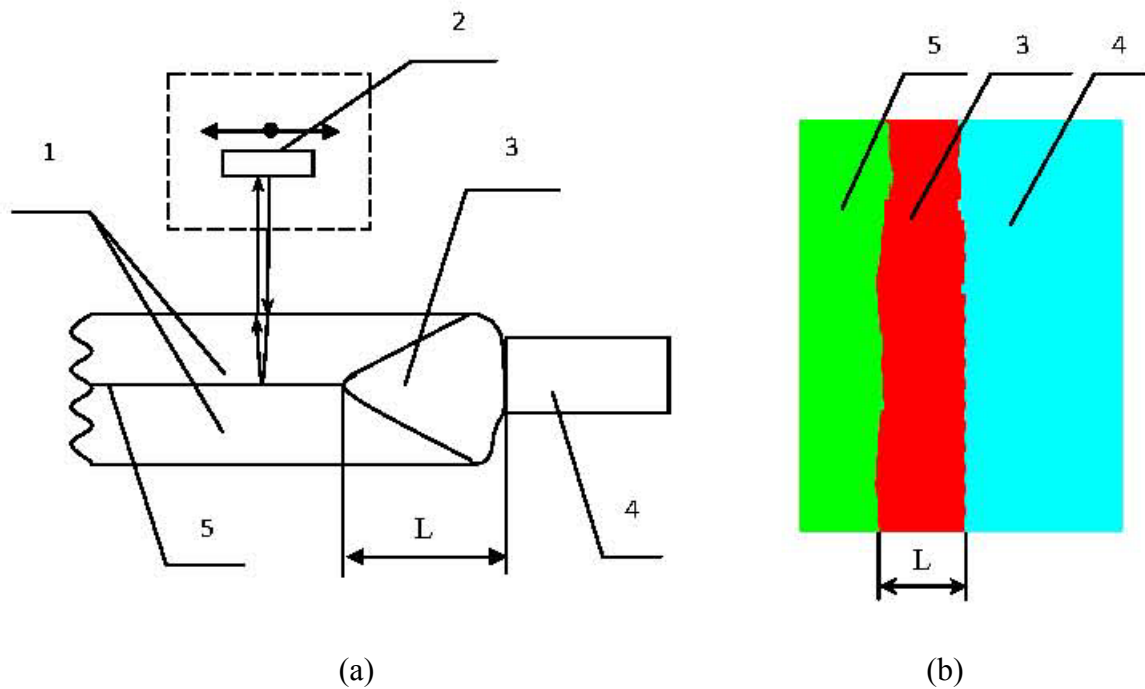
a – scheme of insonification; b – ultrasonic image; 1 – welded parts; 2 – piezo-electric probe (PEP); 3 – weld; 4 – acoustic screen; 5 – internal surface of welded parts; L – depth of penetration.
